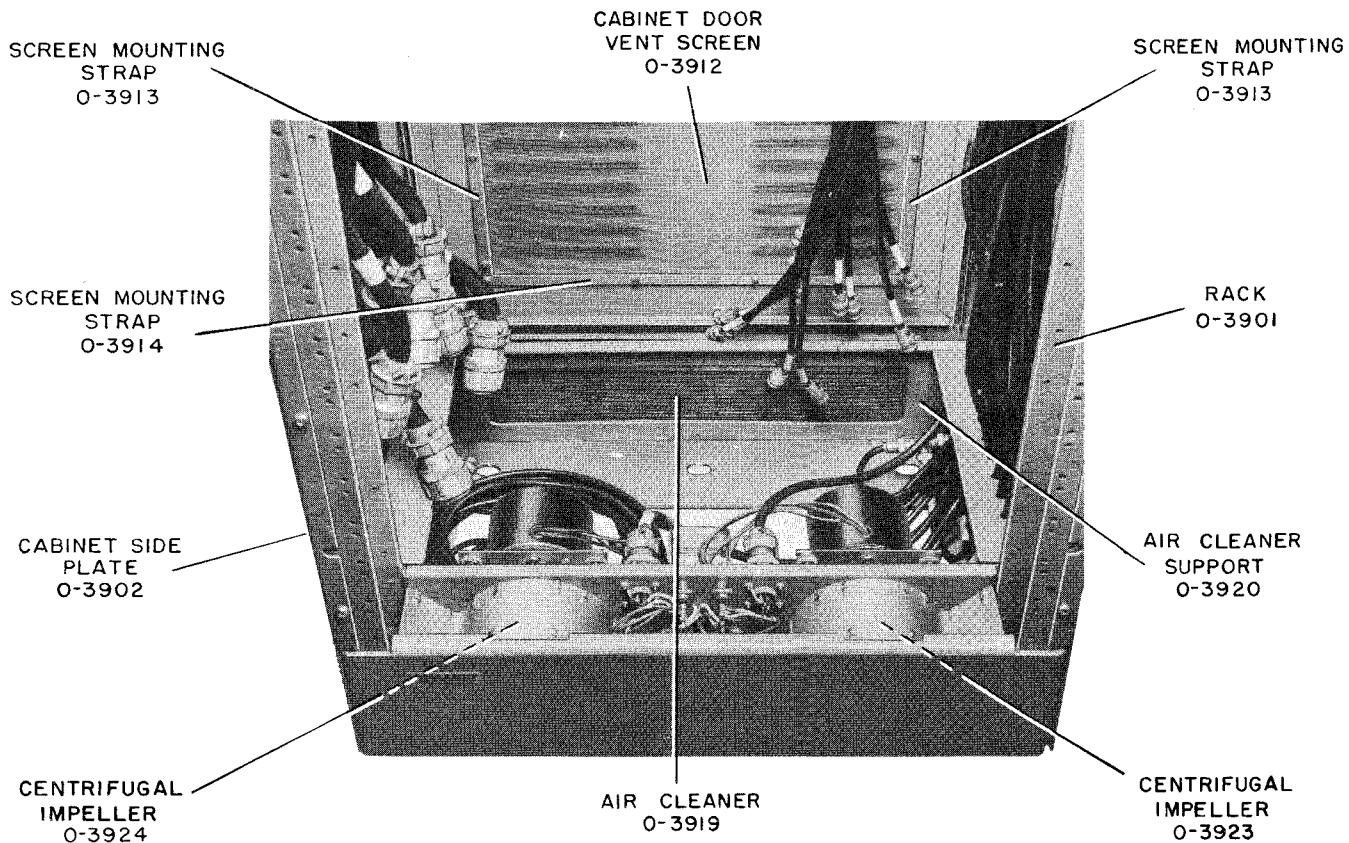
Component Locations, Detailed View of Bottom of Cabinet CY-860/FRR-24
